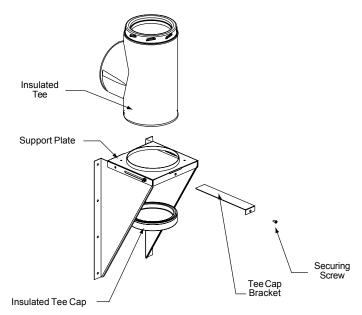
Explosion View - Wall Support, Insulated Tee and Tee Cap, Tee Cap Bracket and securing Screw.
